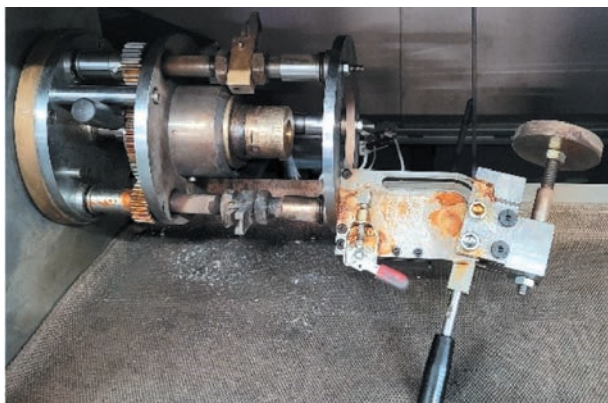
Tool mounted in the working space of the AS-03 Welding Station
